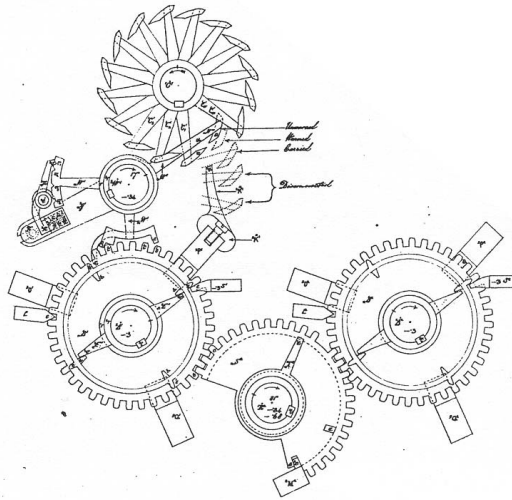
Design drawing. Addition and carriage mechanism (Science Museum Library Babbage Papers, drawing BAB [A] 171 part, "Difference Engine No. 2. Addition Carriage and mode of Driving the Axes," undated). This original layout by Babbage has a design flaw. (Drawing courtesy of the Science Museum, London.)
